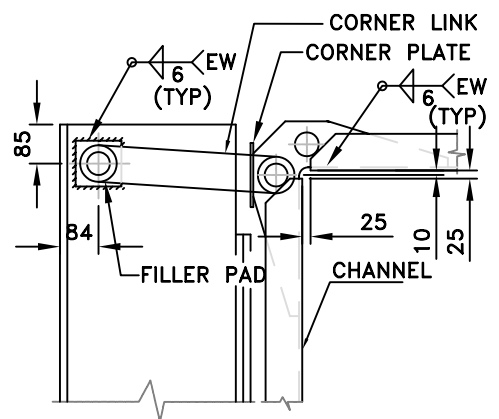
BUCKSTAY ARRANGEMENT FOR WATER WALL TUBES
